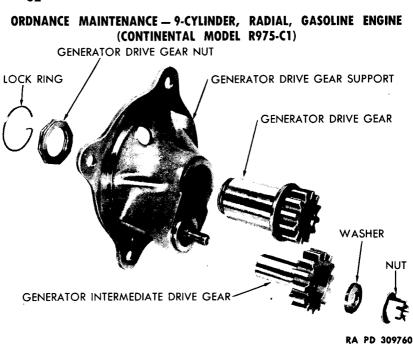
Generator Drive Gear and Support Assembly Disassembled
